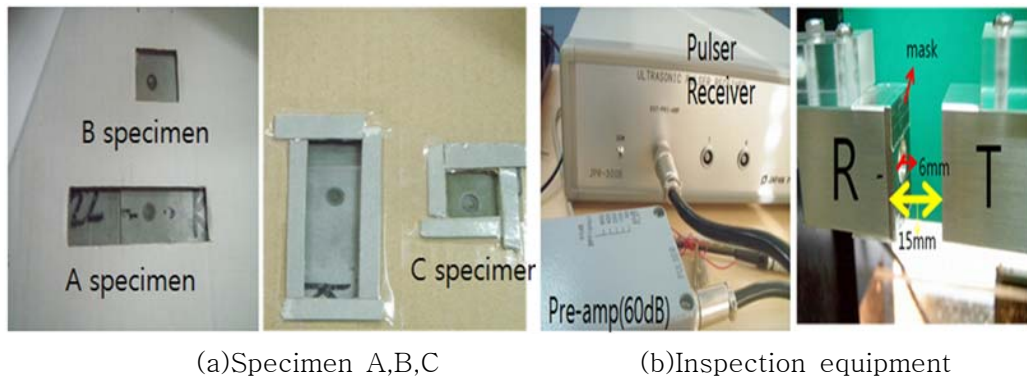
Spot welding specimen A,B,C & inspecting equipment, probe
